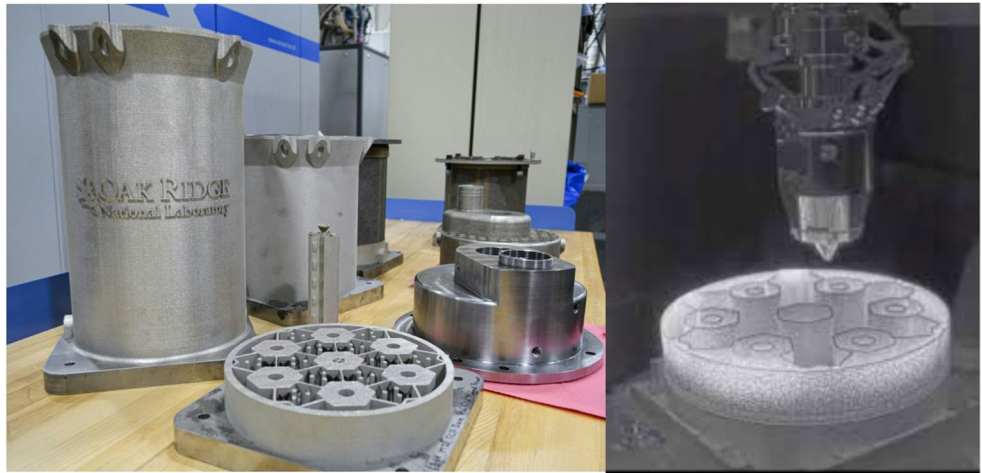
3D-printed fuel assembly component by Framatome [138]
